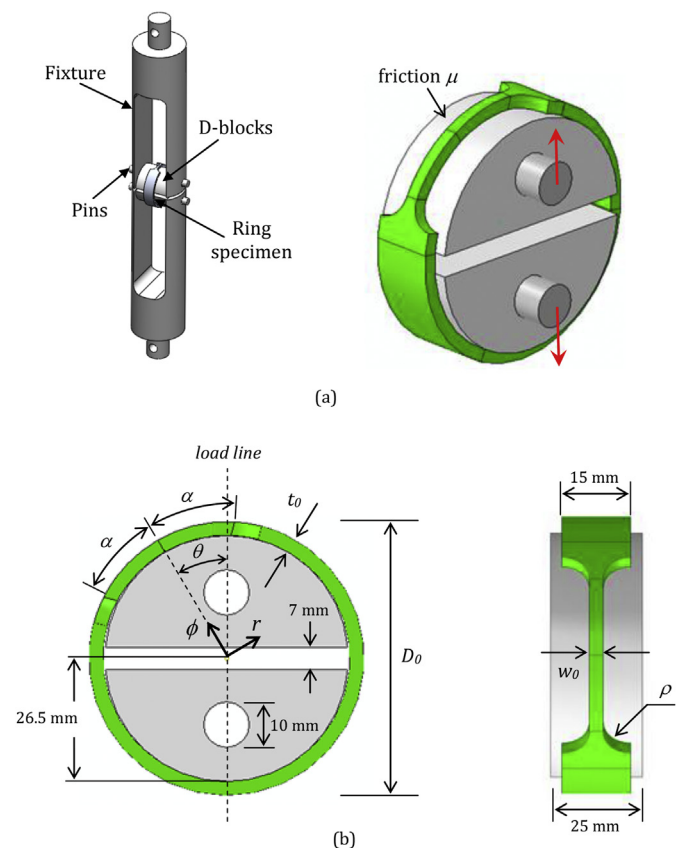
(a) Test setup and (b) configuration of the ring specimen.
